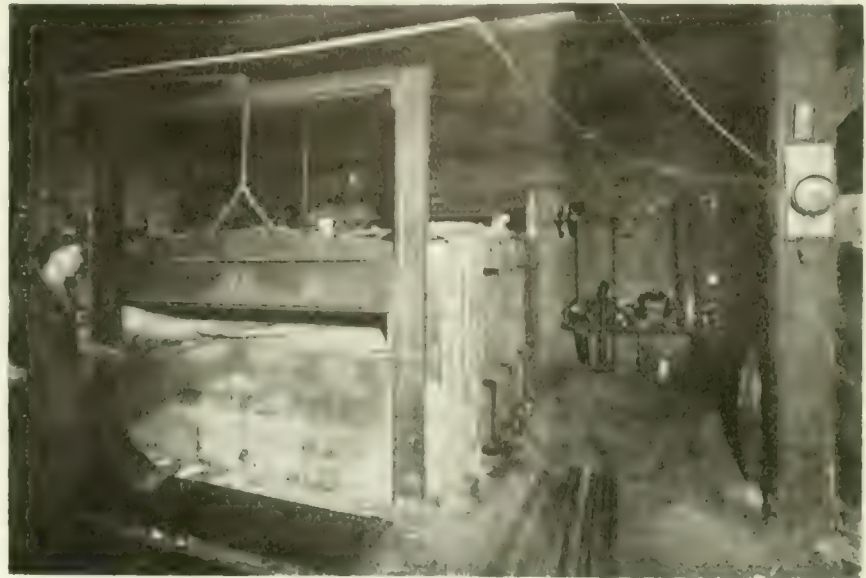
GENERAL EXTERIOR VIEW OF FURNACE, OIL TANK IN FOREGROUND AND PUMPING EQUIPMENT AT BACK.
